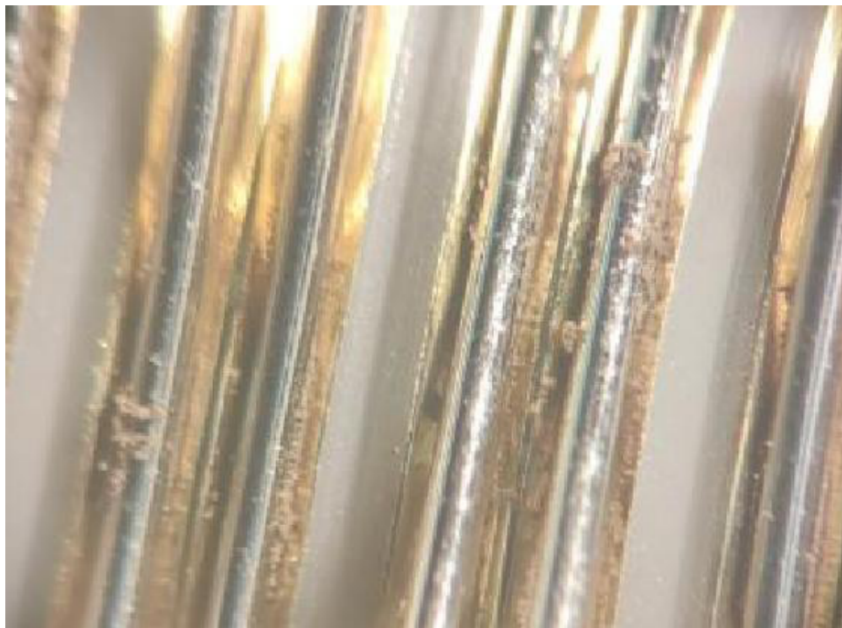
Status of Ring Channel Wear Debris of Product B After Vacuum Testing
